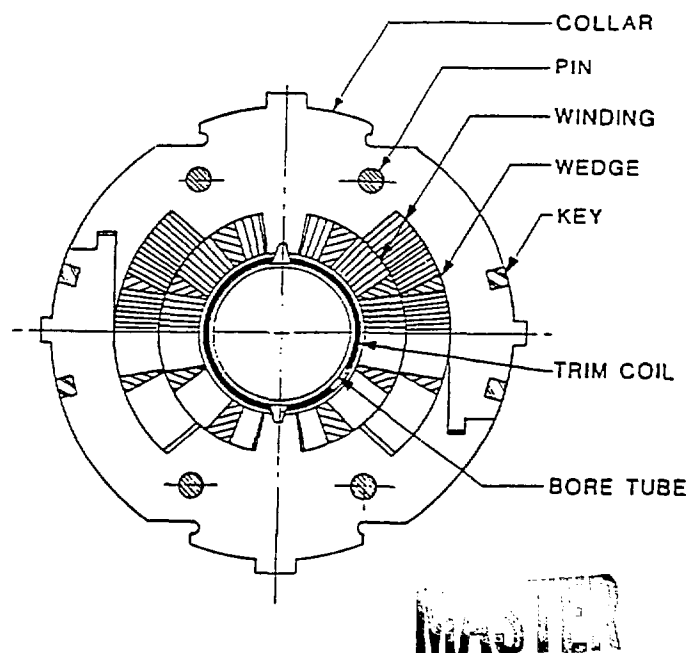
Cross section of collared coil assembly showing bore tube, main coils and stainless steel collar. The trim coil mounted on the outer diameter of the bore tube is not explicitly shown.
